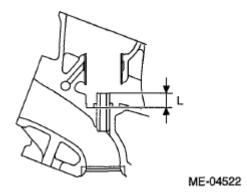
Identifying Valve Guide Protrusion Amount "L" Courtesy of SUBARU OF AMERICA, INC.
